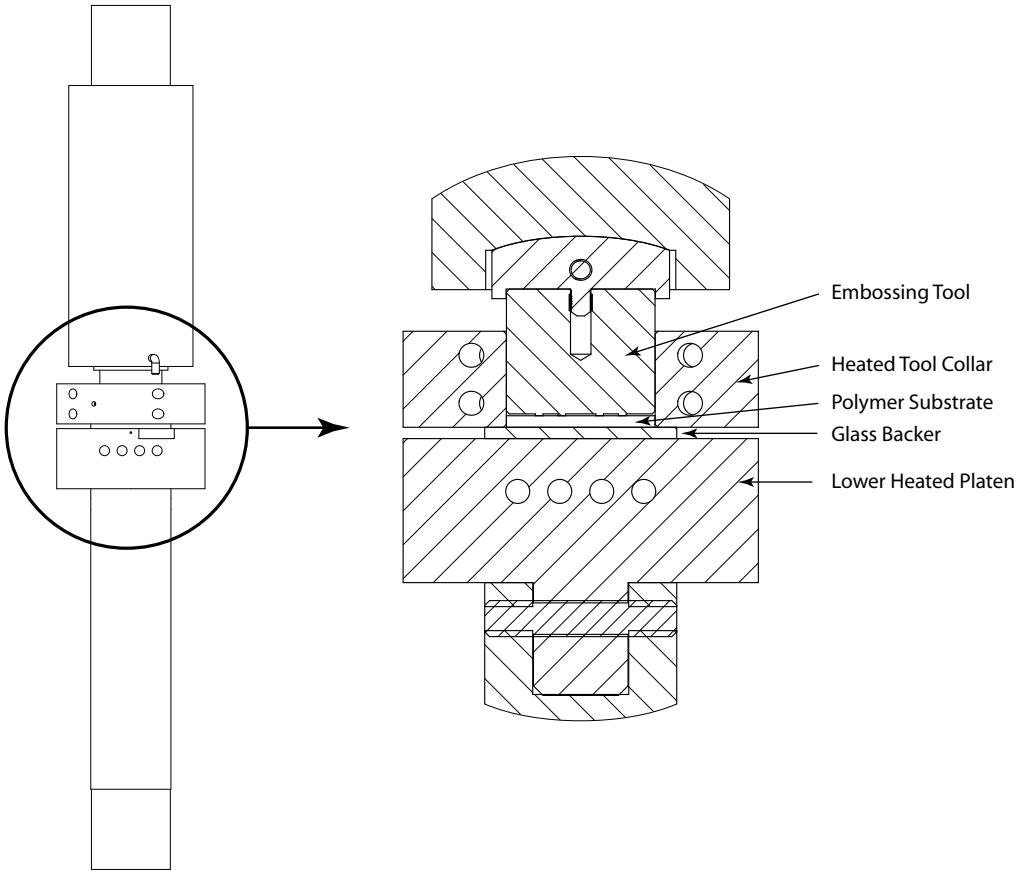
Drawing of embossing assembly designed by Vikas Srivastava.
